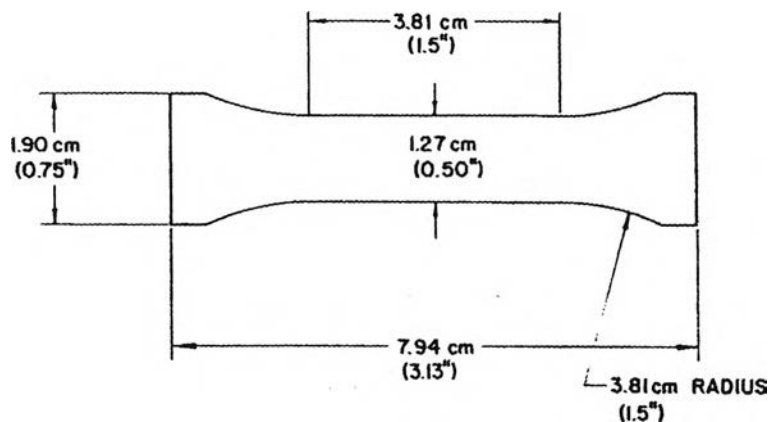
Compression Test Specimen for Materials Less than 3.2 mm Thick
